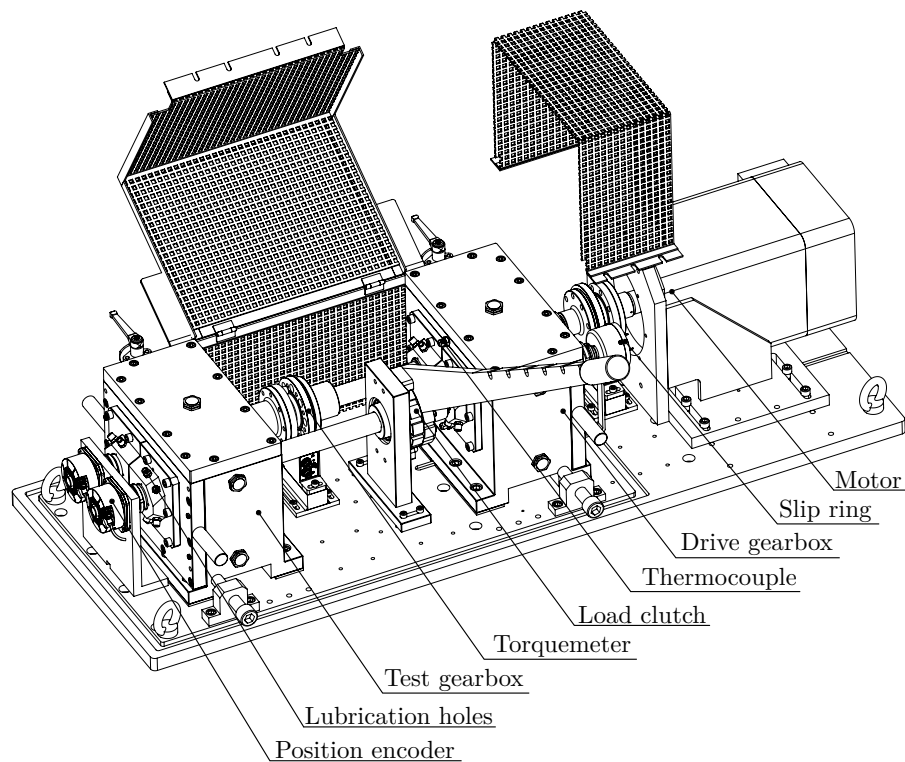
Designed back-to-back test rig for external cylindrical gears
